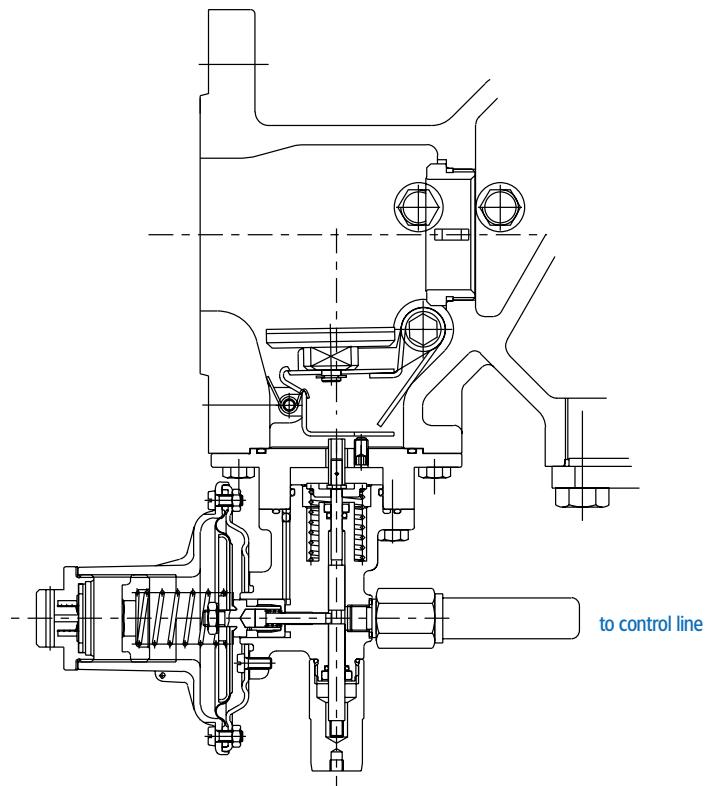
Type 033 Safety Shutoff Valve – Sectional view
